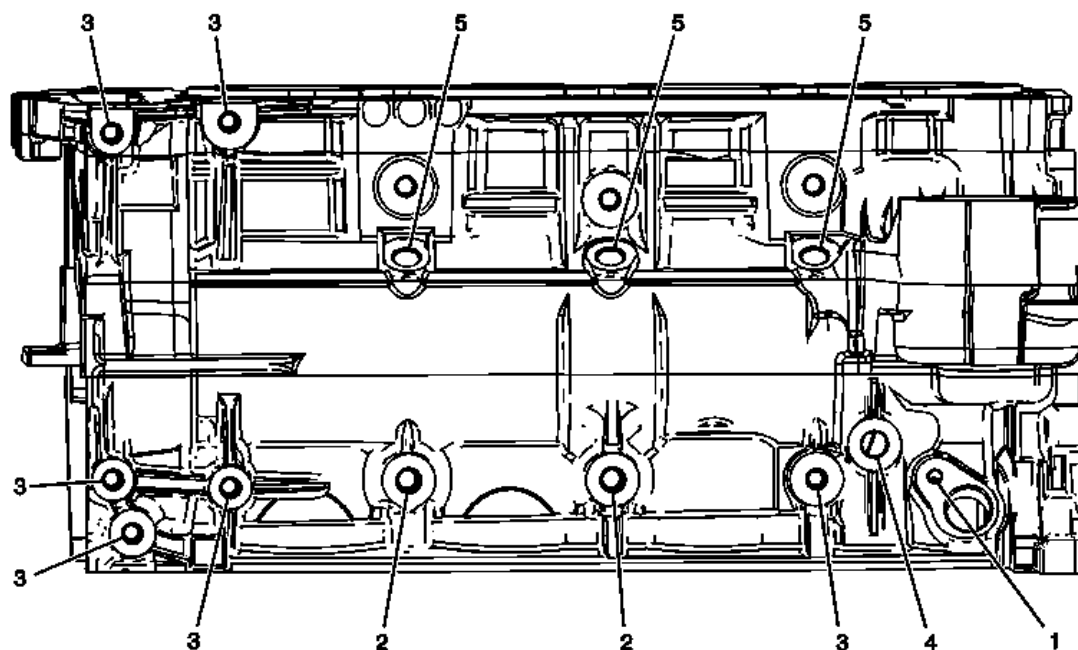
Identifying Bolt Size & Locations On Engine Block - Left Side View
